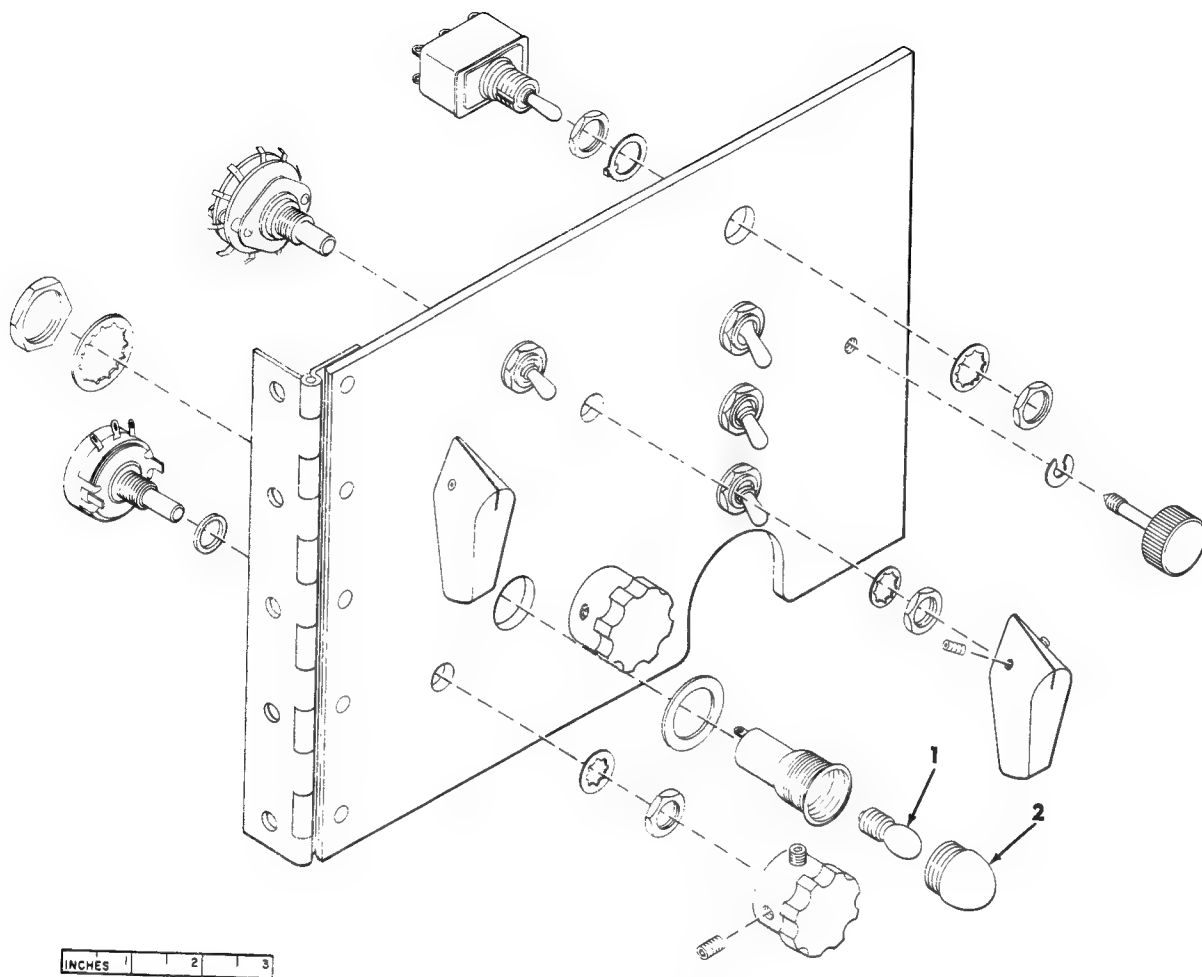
Coder set, radar KY-229/MPA (8512239)—partial exploded view
